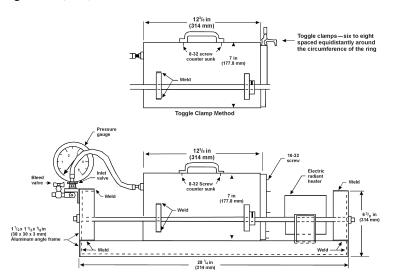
Evacuation Slide Material Test Apparatus – Front View
